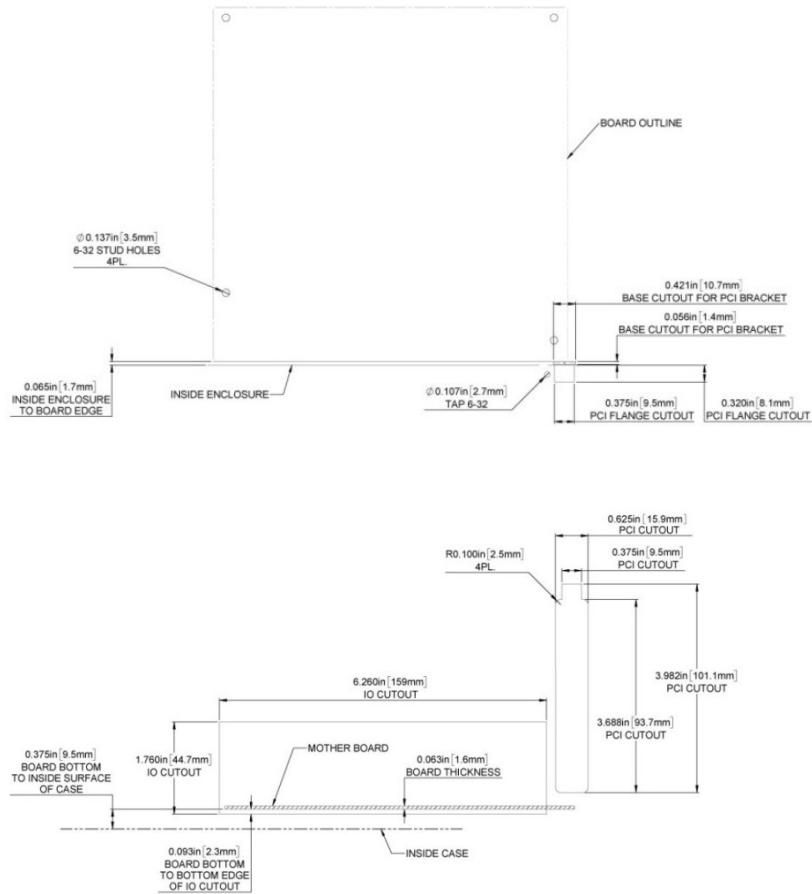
Mini ITX enclosure back panel I/O and PCI cutouts
